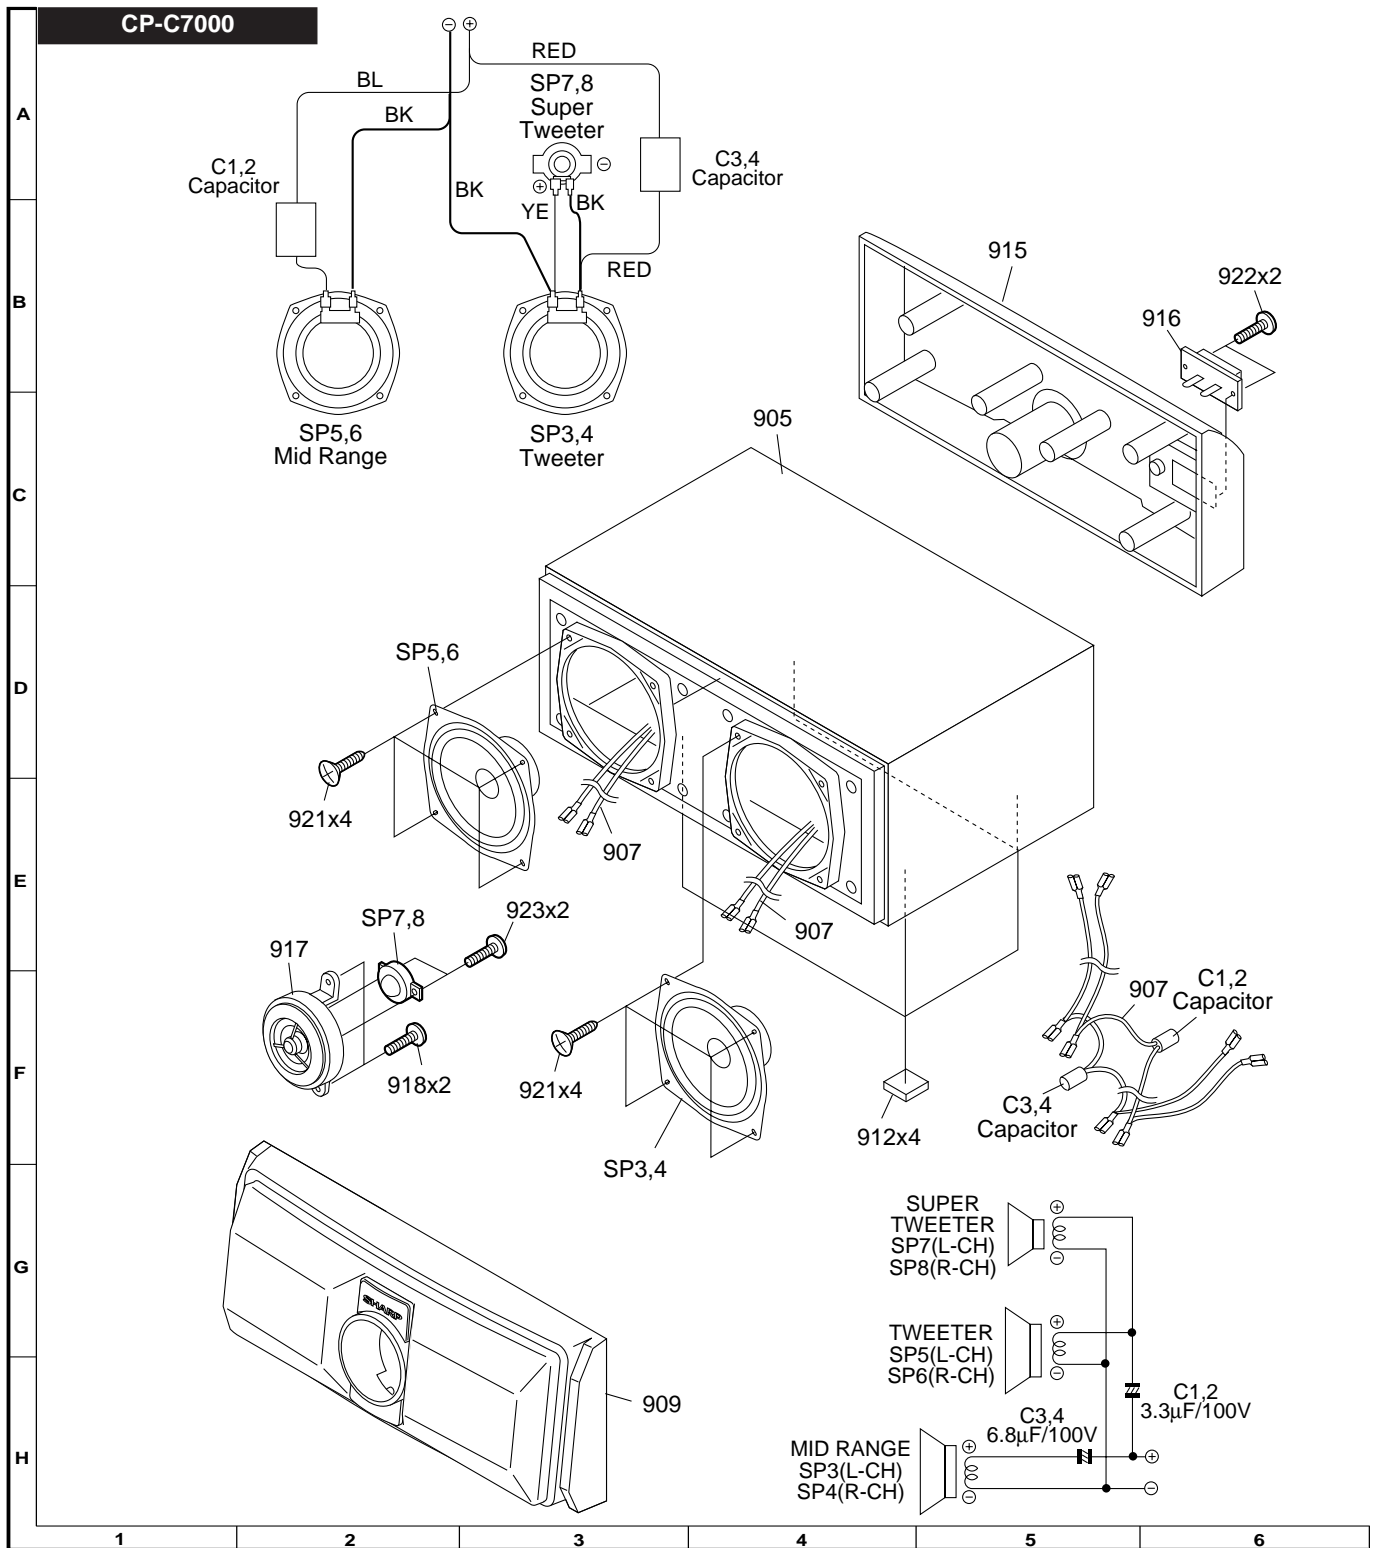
SPEAKER EXPLODED VIEW (2/2)
